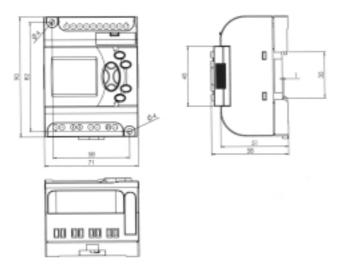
AF-10 FAB Series installation size (Unit: mm)
